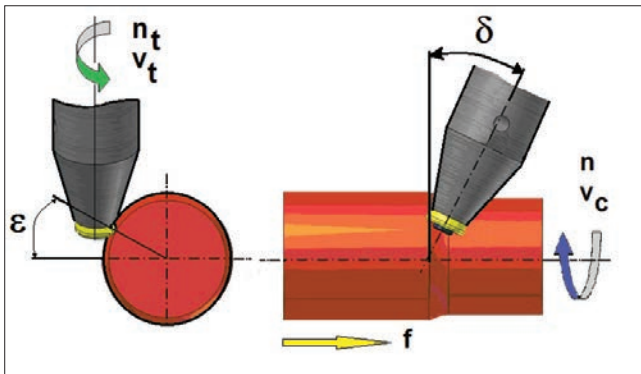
Angles determining the setting of the rotary face turning tool in the machine-tool holder-workpiece-tool system
